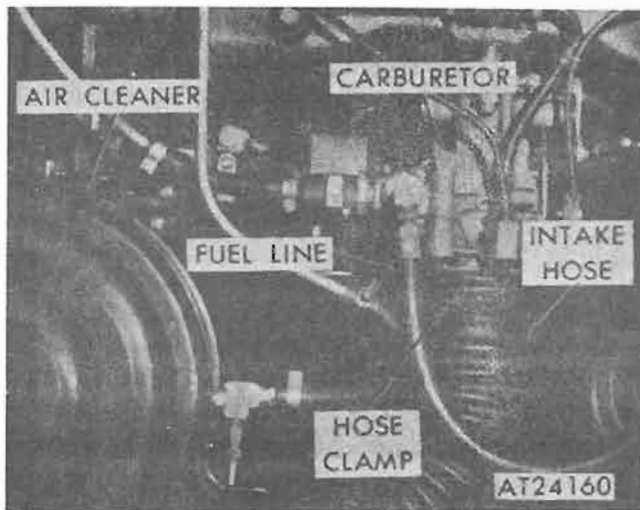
Disconnecting or connecting carburetor intake hose and fuel line.
